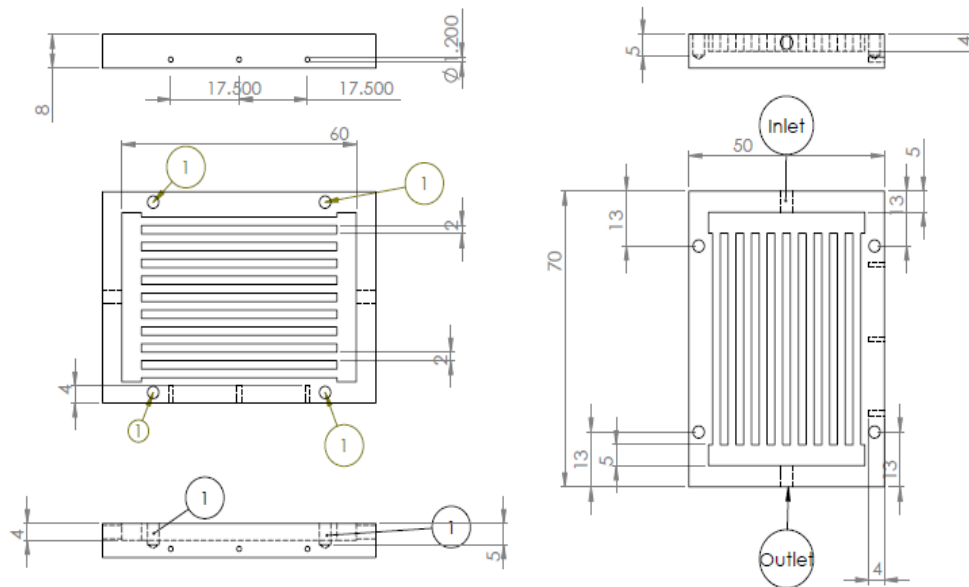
3D- Drawing for the 2mm Minichannel heat sink
